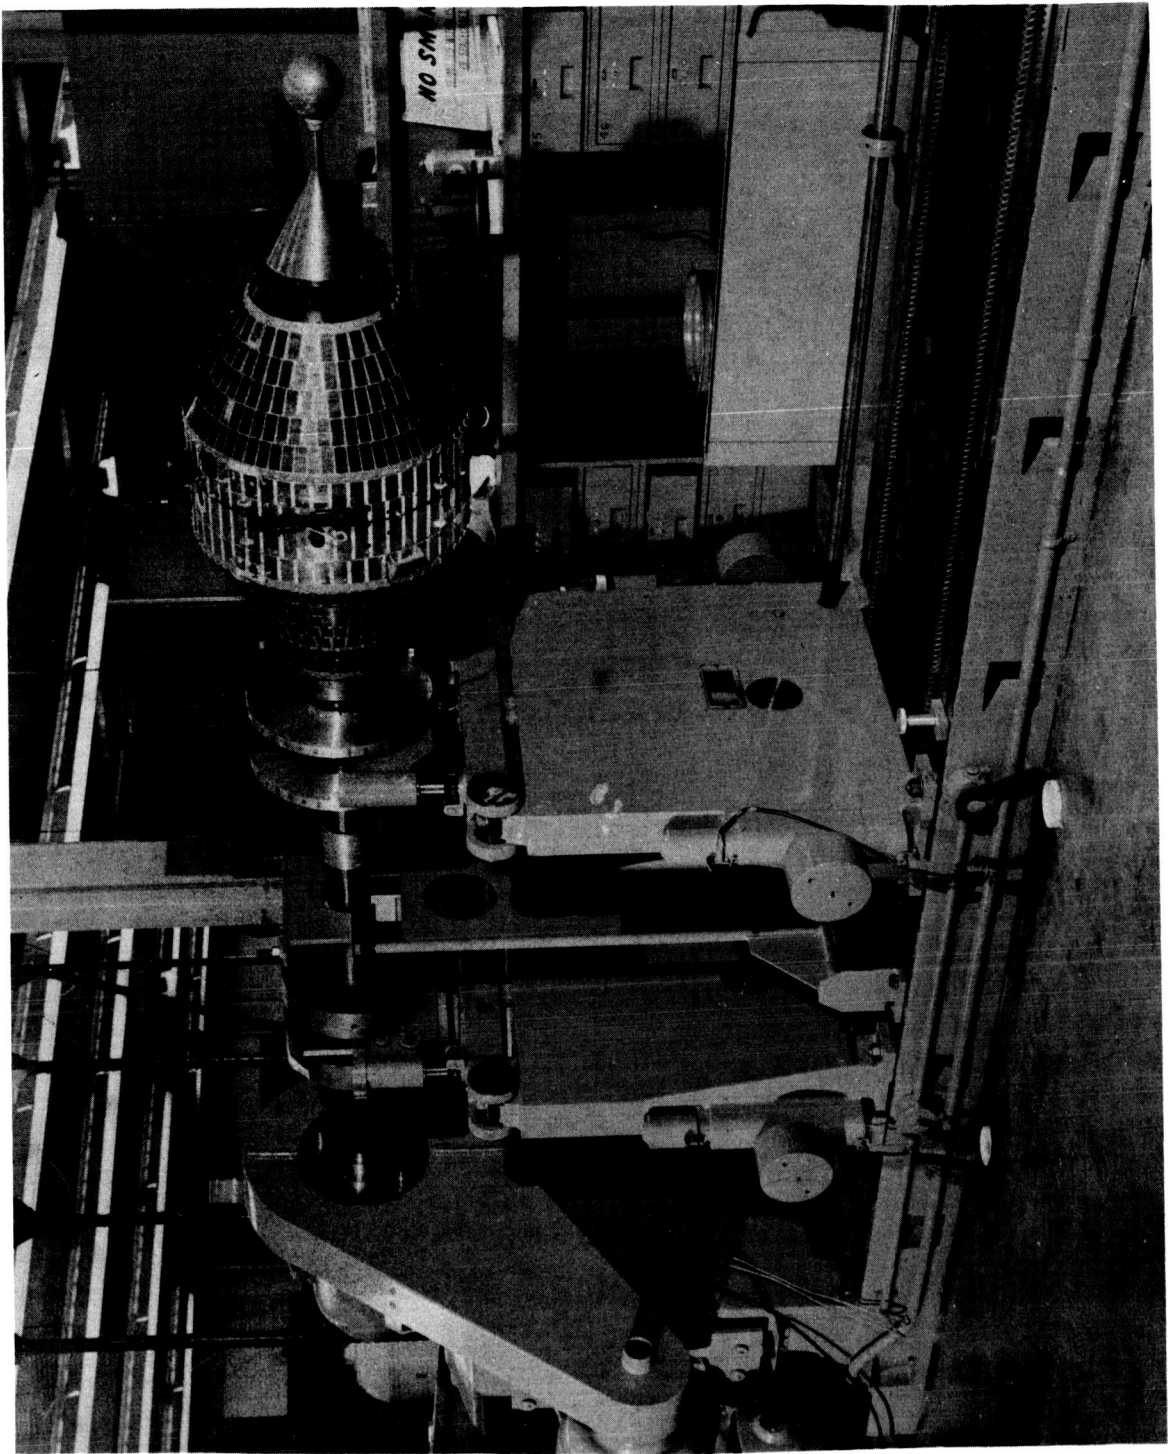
IE-A Flight No. 1 Spacecraft on Dynamic Balancing Machine
